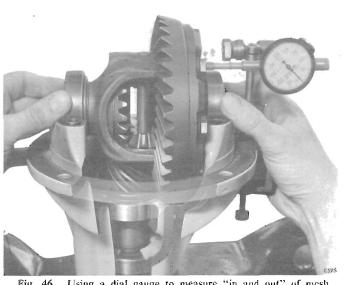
Using a dial gauge to measure "in and out" of mesh
